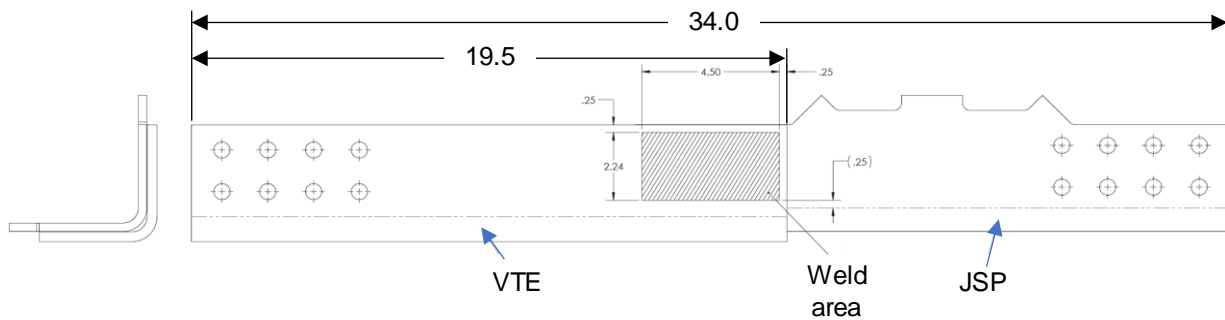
Subelement weldment geometry. Load introduction fixtures are not shown. All dimensions in inches.
